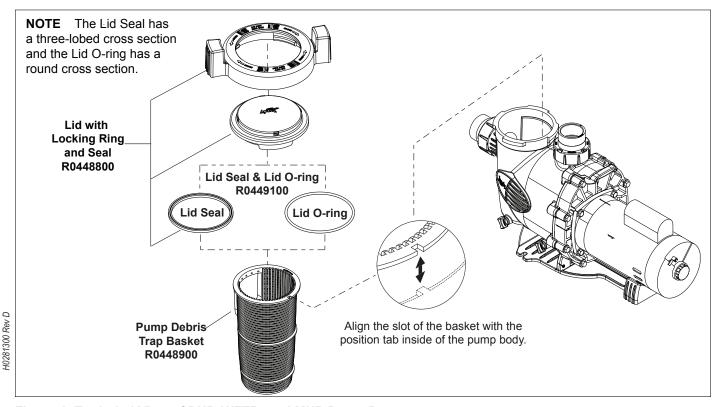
Exploded View of PHP, WFTR, and MHP Pump Parts
